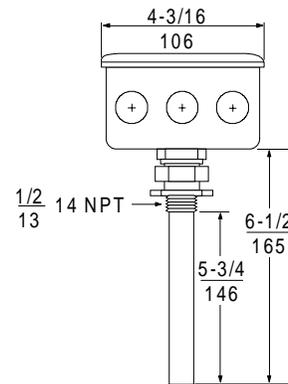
TE-6100-4 High Temperature Well Insertion Element Dimensions (in./mm)
